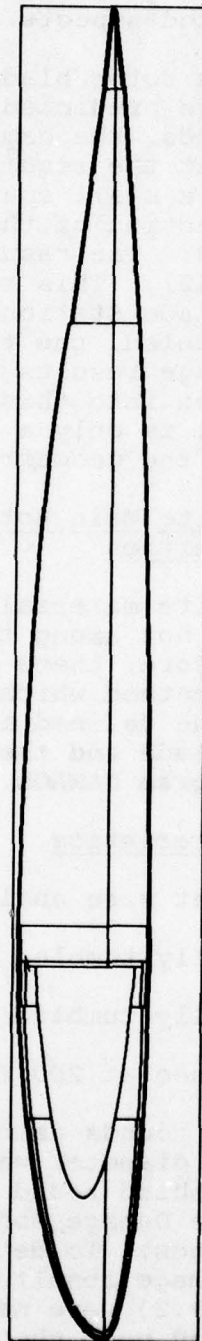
CALCOMP drawing of the OH-58C composite main rotor blade.
